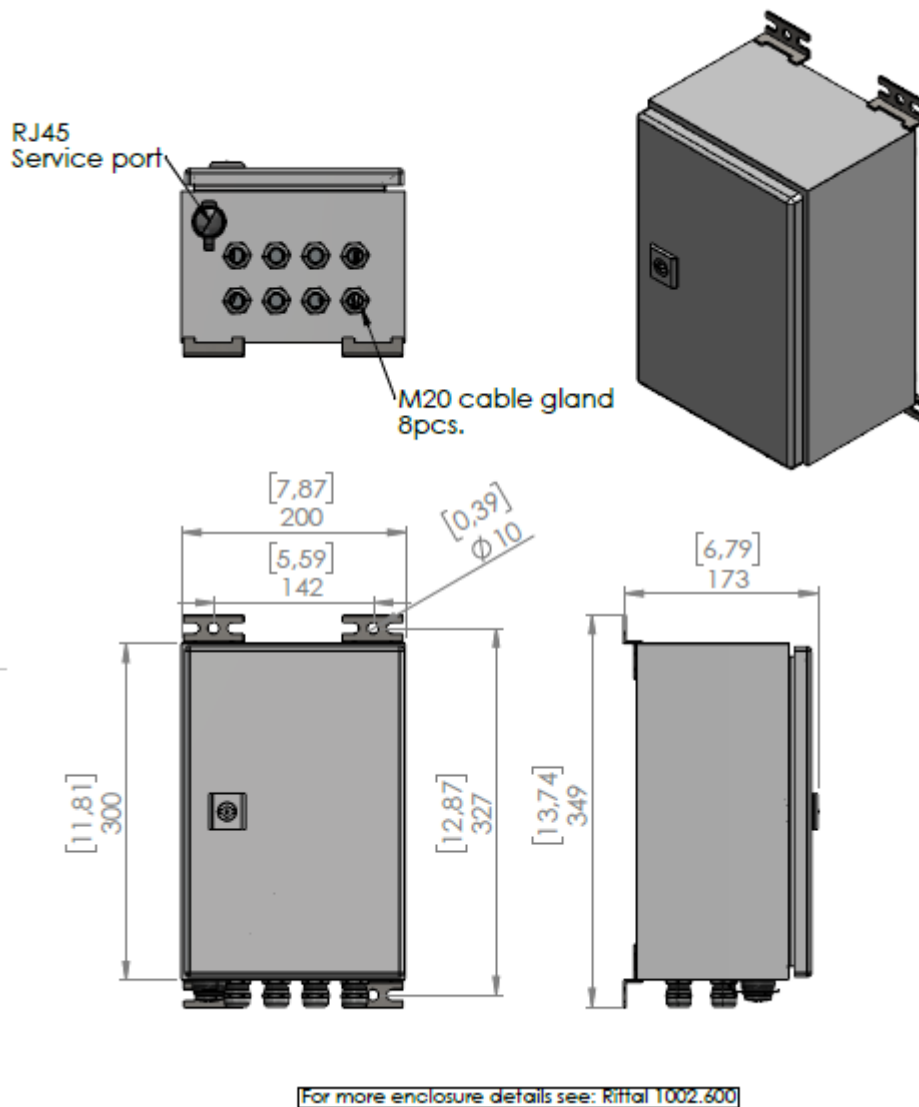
Dimensional drawing of Modular Connection Unit enclosure DWG No. 10179.
